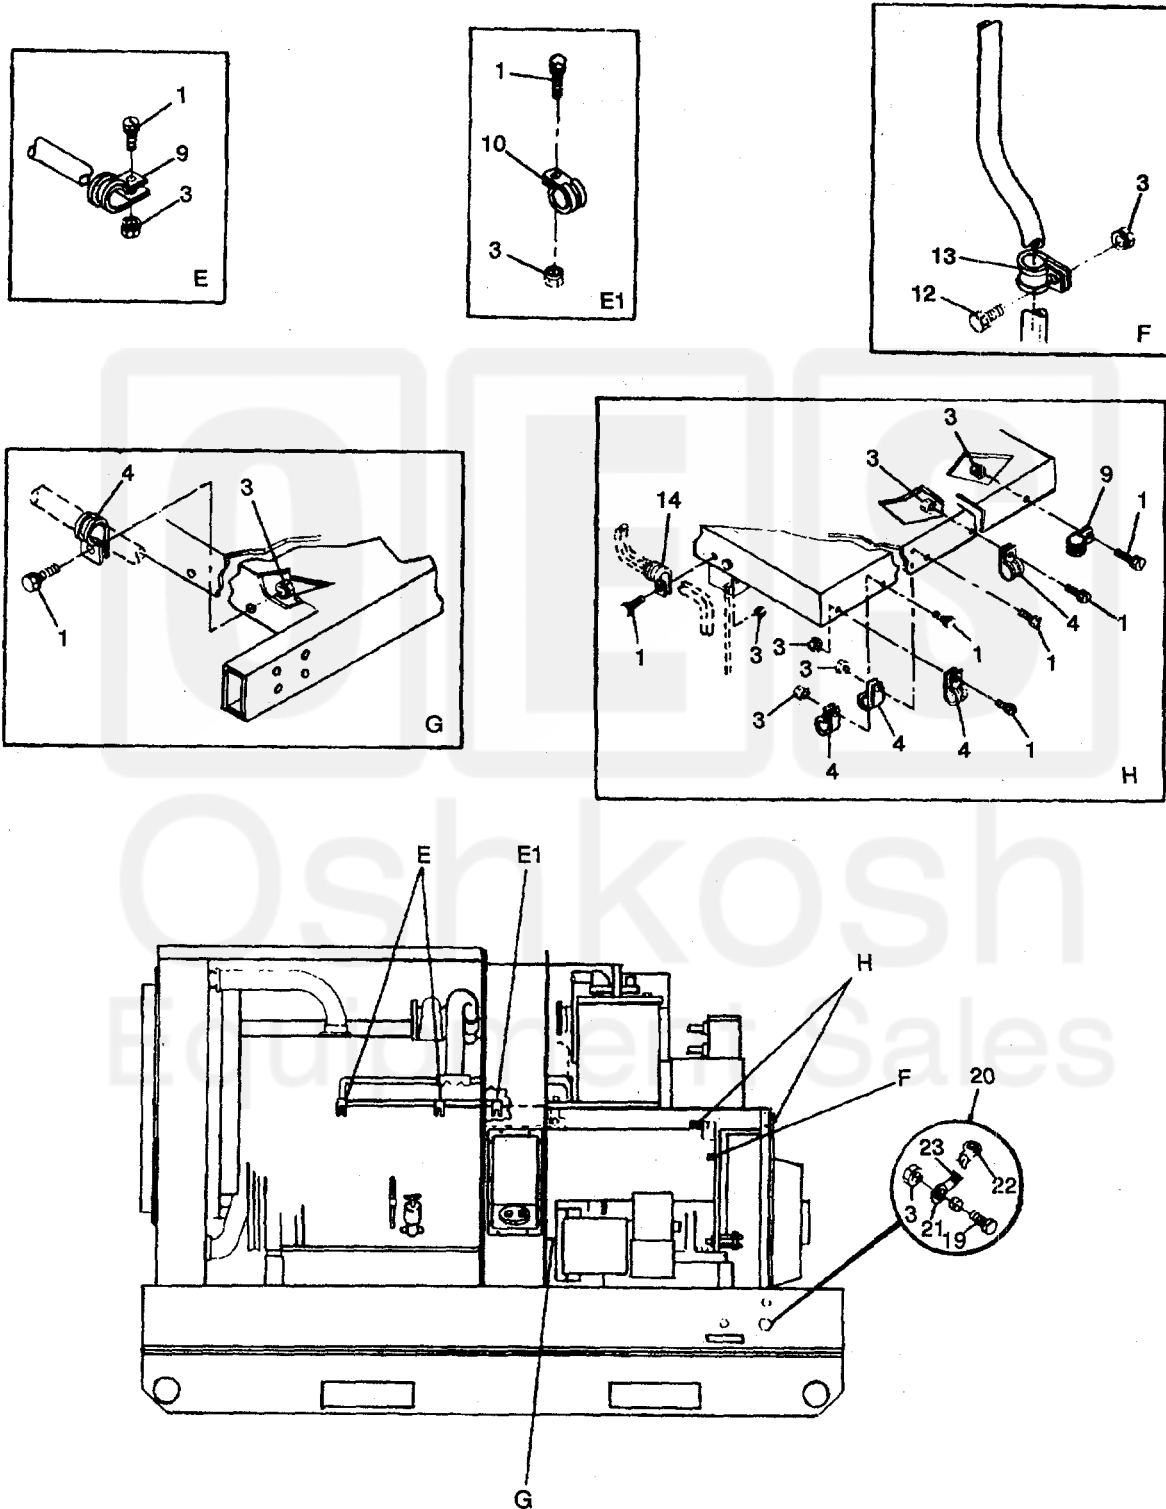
Engine Generator and Chassis Wiring Harness (Sheet 2 of 2).
